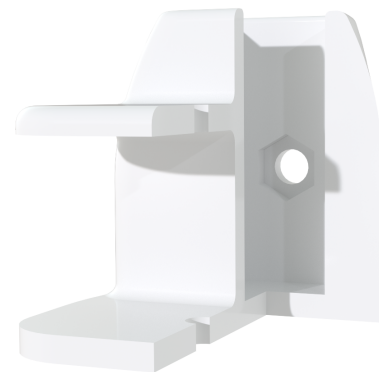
A rendered split-view of the fixture. Inside the fixture there is a hexagonal hole for fitting a nut
